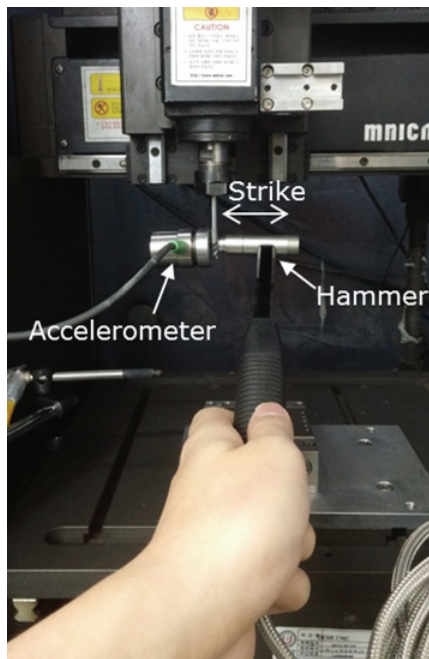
Illustration of experimental setup for the FRF of the desktop CNC machine
